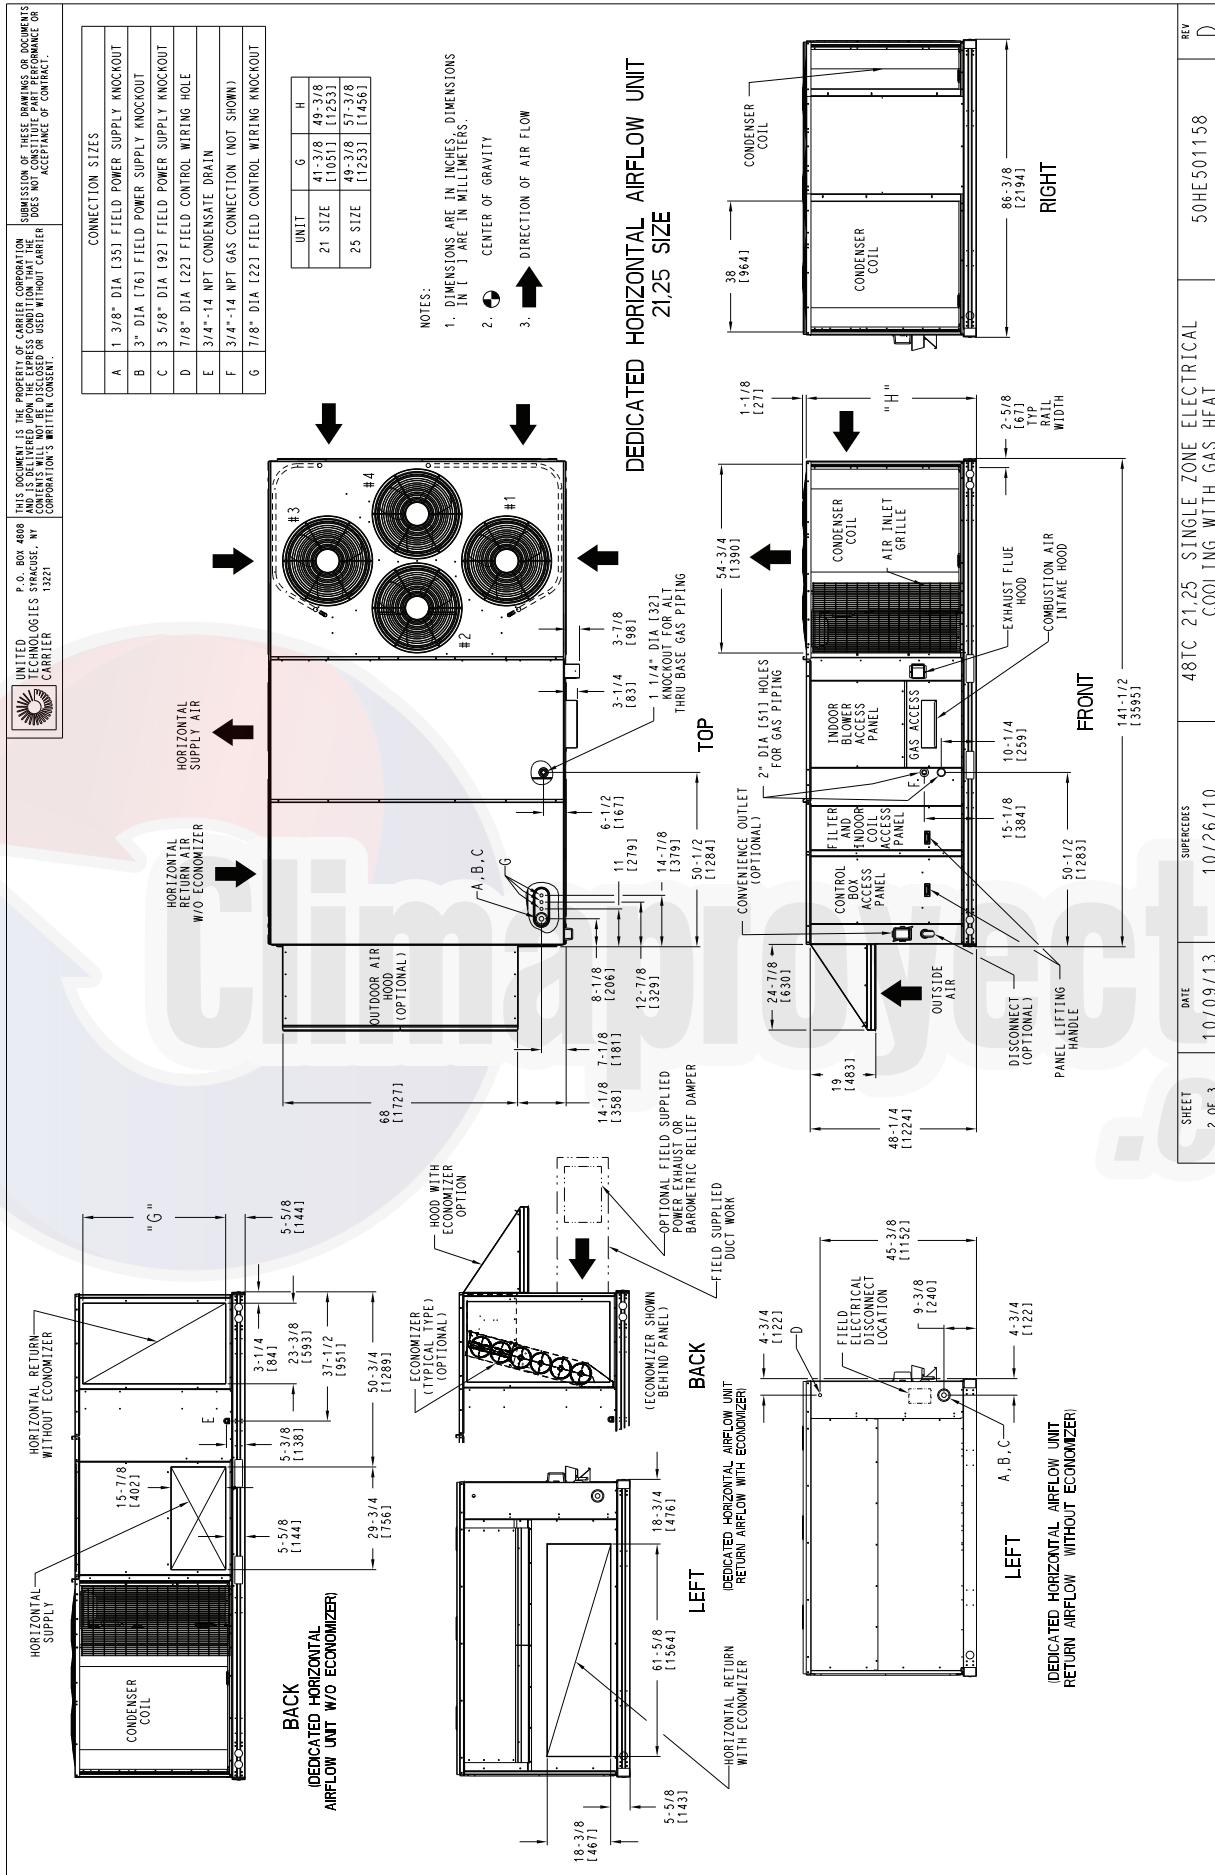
48TC21 and 25 Dimensional Drawing
